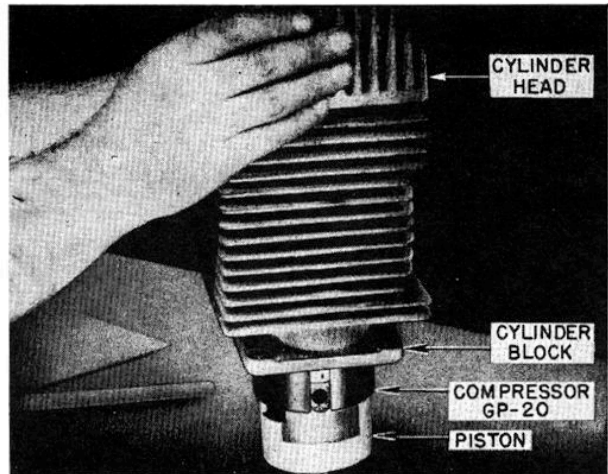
INSTALLING CYLINDER BLOCK ONTO PISTON
